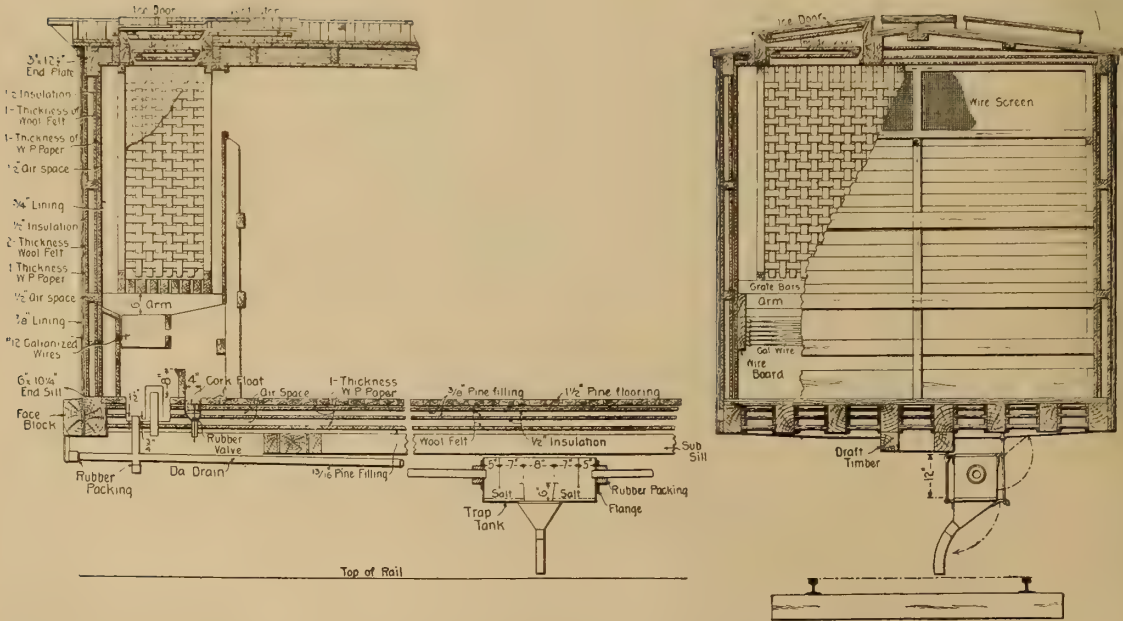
ARRANGEMENT OF PERMANENT FLOOR RACKS. JENINGS SYSTEM OF REFRIGERATION.
